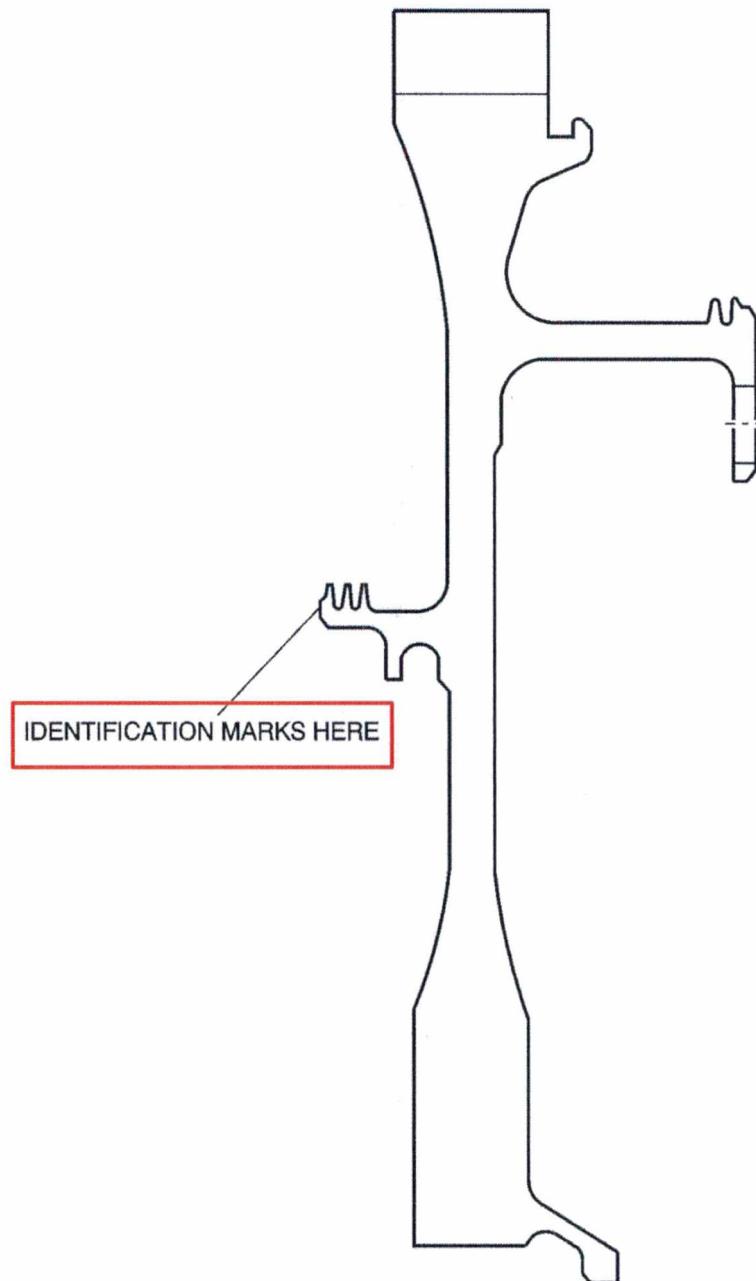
Identification marking location on the LPT Stage 1 Rotor Disc Assembly
